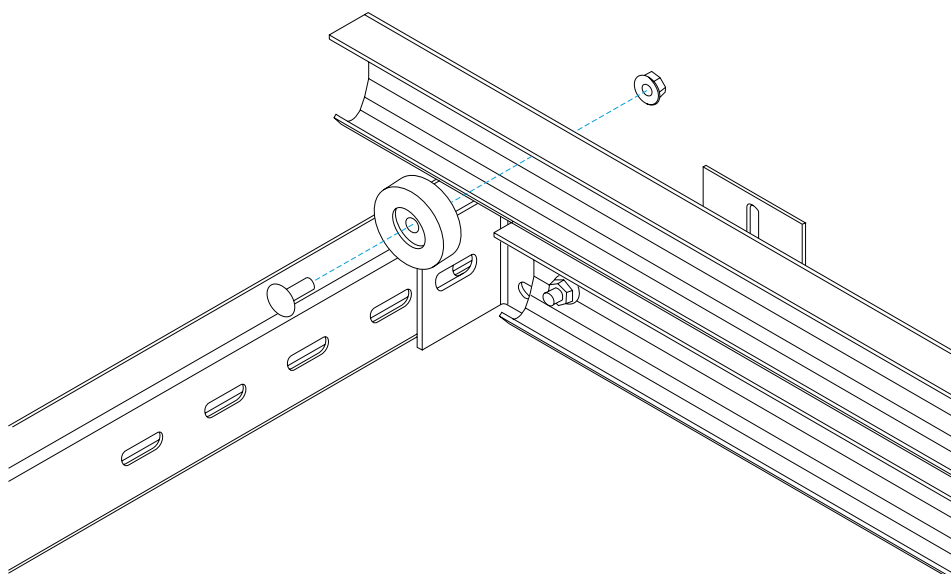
CEILING ANCHORING FOR DOOR TYPES KPSRL AND KPSRLV
